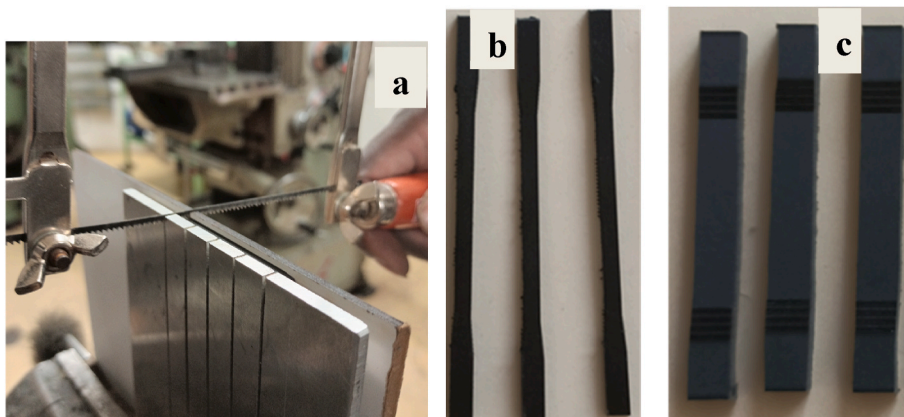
a-cutting operation, b-pure wall specimens, c-specimens without walls.
